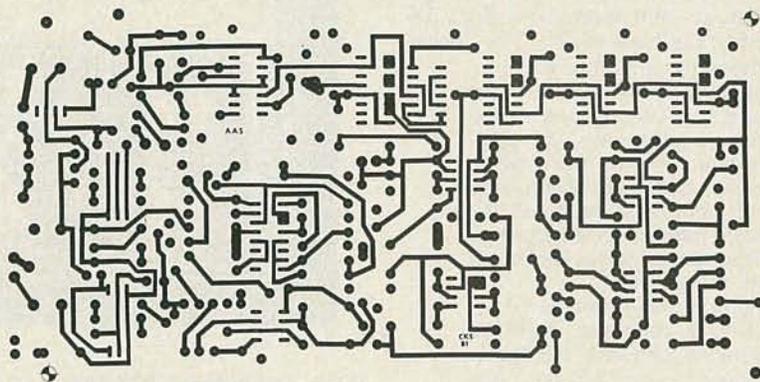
FOIL PATTERN for the bottom side of the PC board. Note that the PC board is double sided (see Fig. 9).
